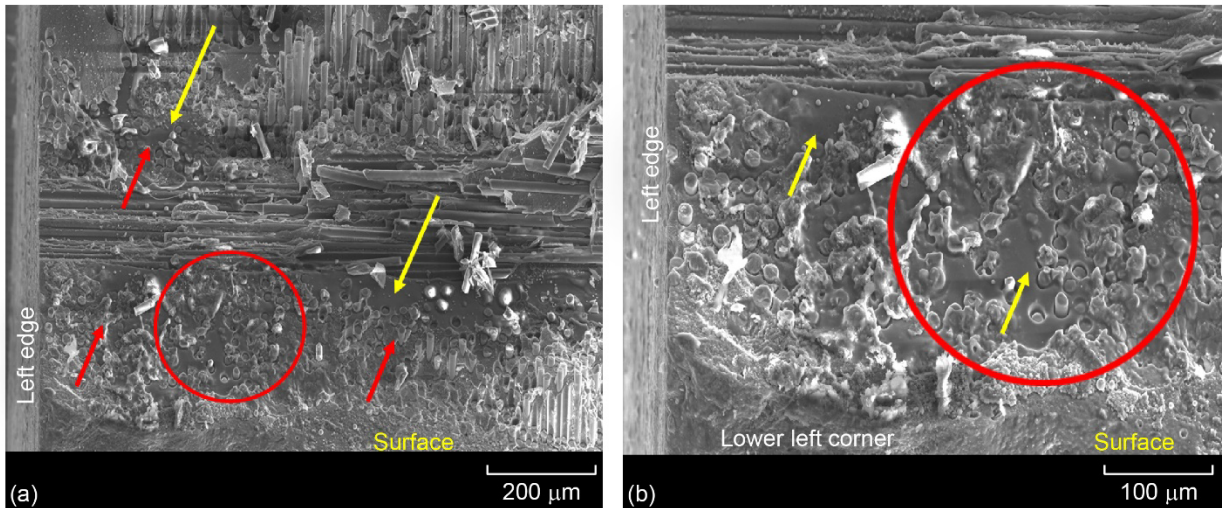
Fracture surface of a CMC specimen without holes tested in HCF at 1,316 °C and gross-section maximum stress of 248 MPa; 4.7 h to failure.
